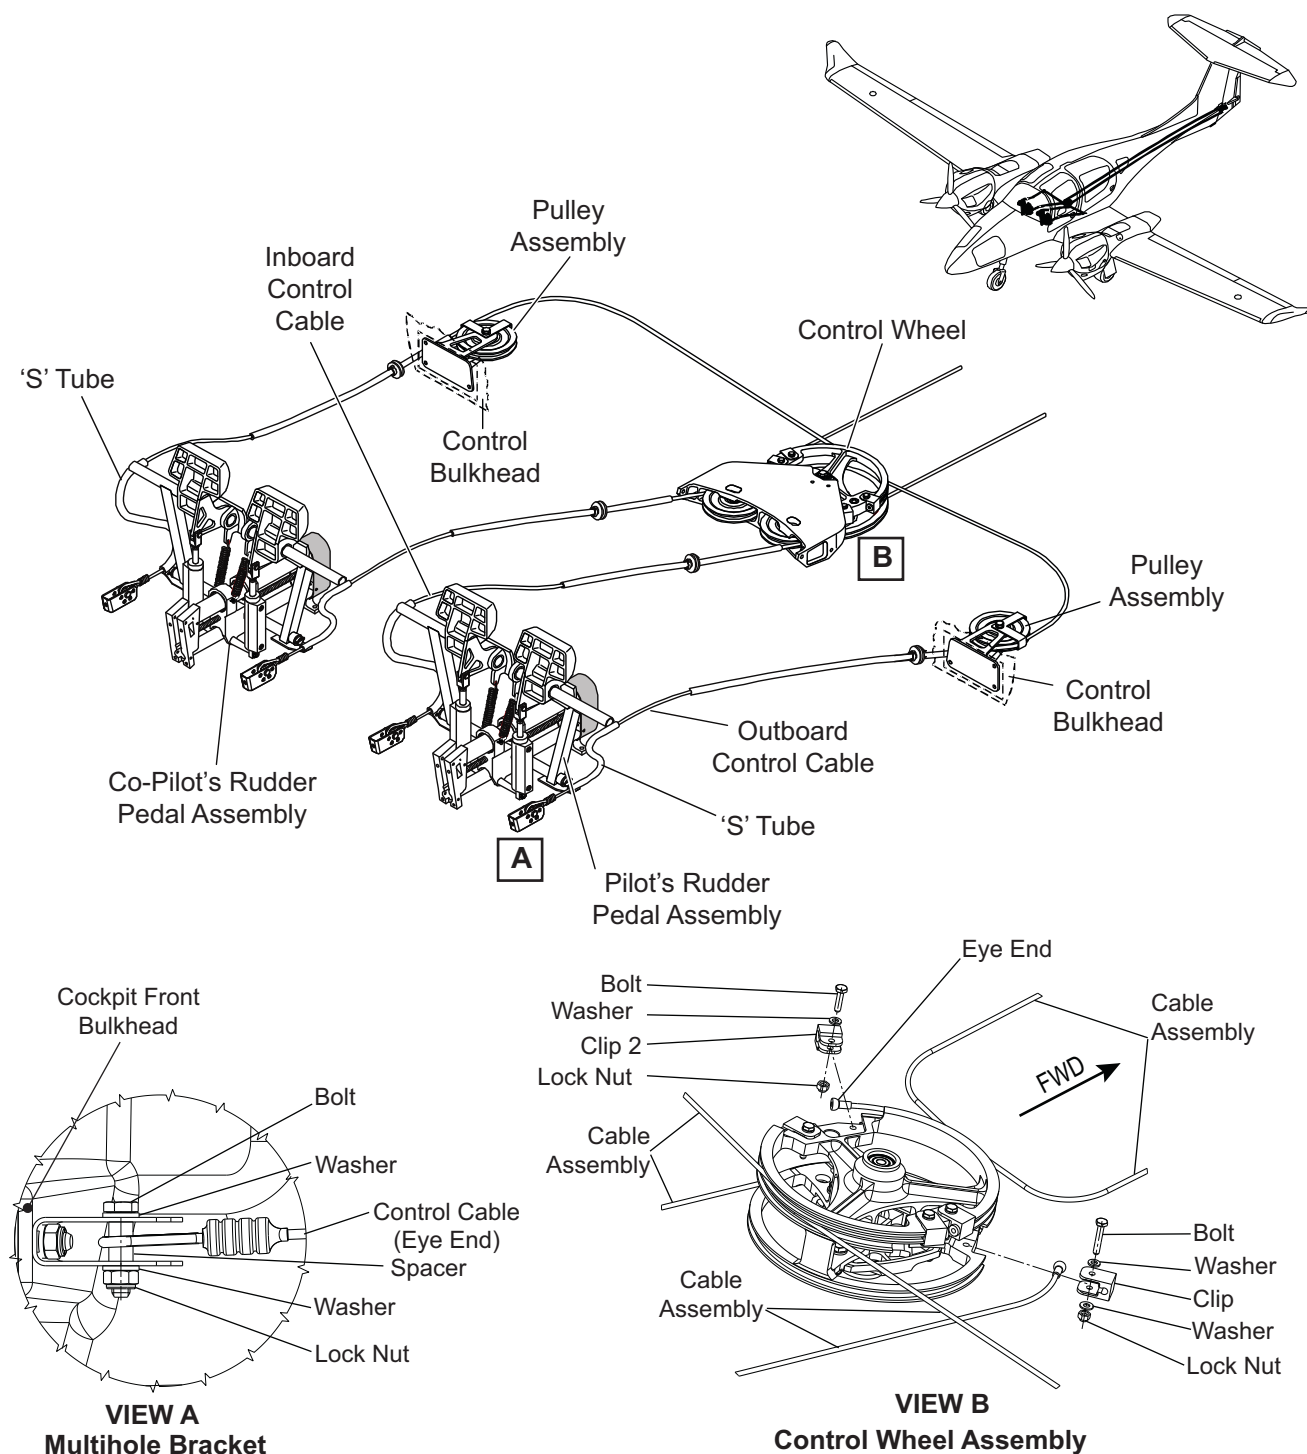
Rudder Control (Front Cables) - Removal/Installation
